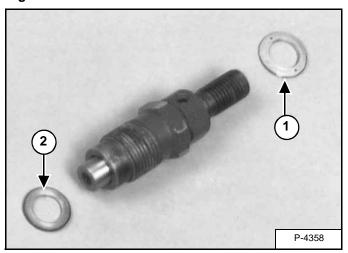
shows the injector nozzle removed from the cylinder. Inspect the injector and replace if necessary.
